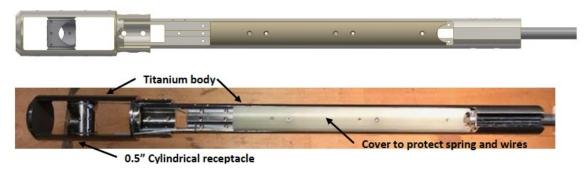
3D CAD drawing and picture of newly designed rotating probe.
